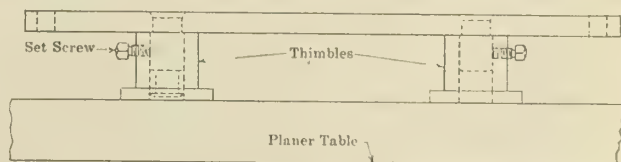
Method of Holding Link Bars on Planer Table When Taking the Last Finishing Cut
